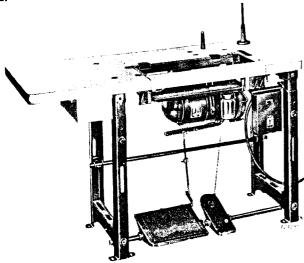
Stand, Table and Electric Transmitter Assembled for Operation of Class 300w Machine
